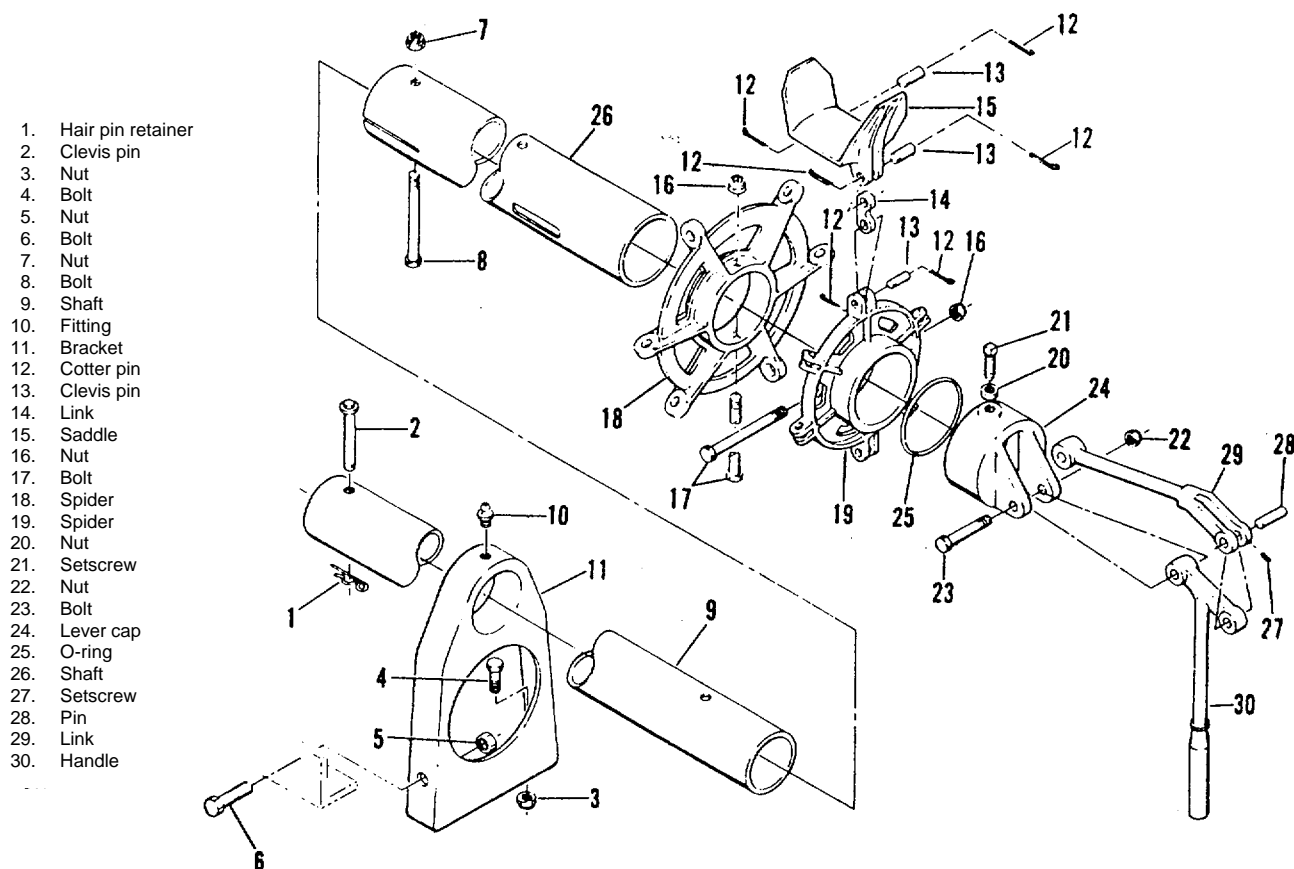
COLLAPSIBLE WIRE REEL
